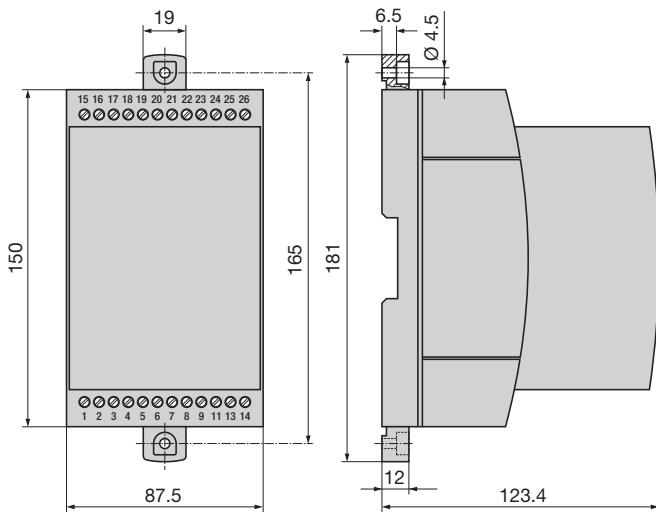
SINEAX DME 440 in housing T24, screw hole mounting brackets pulled out.
